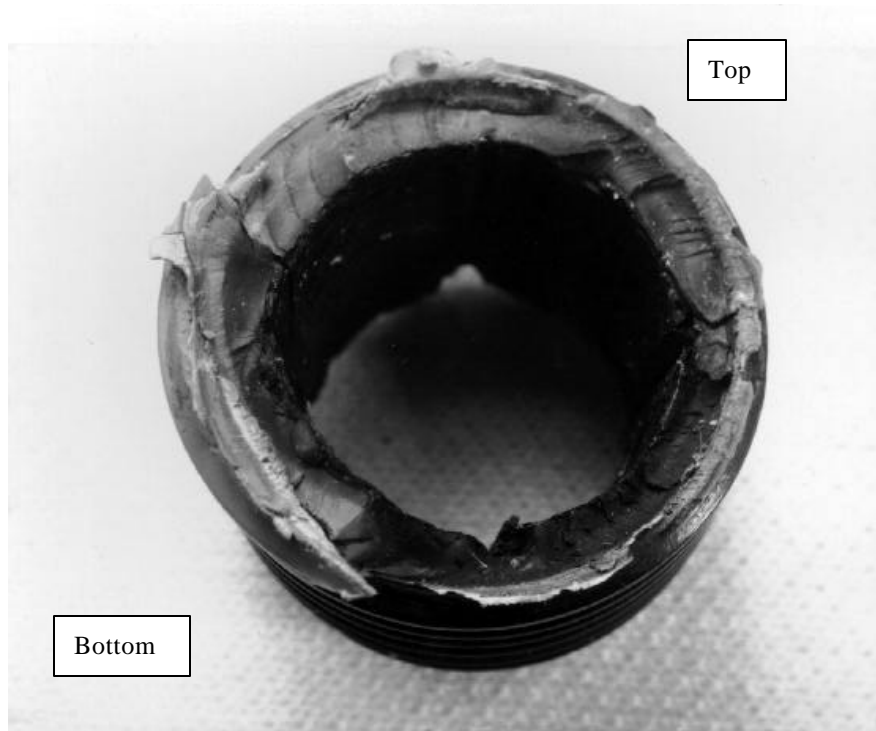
Opposing fracture surface of the fitting threads (Neg#54965, ~4X)
